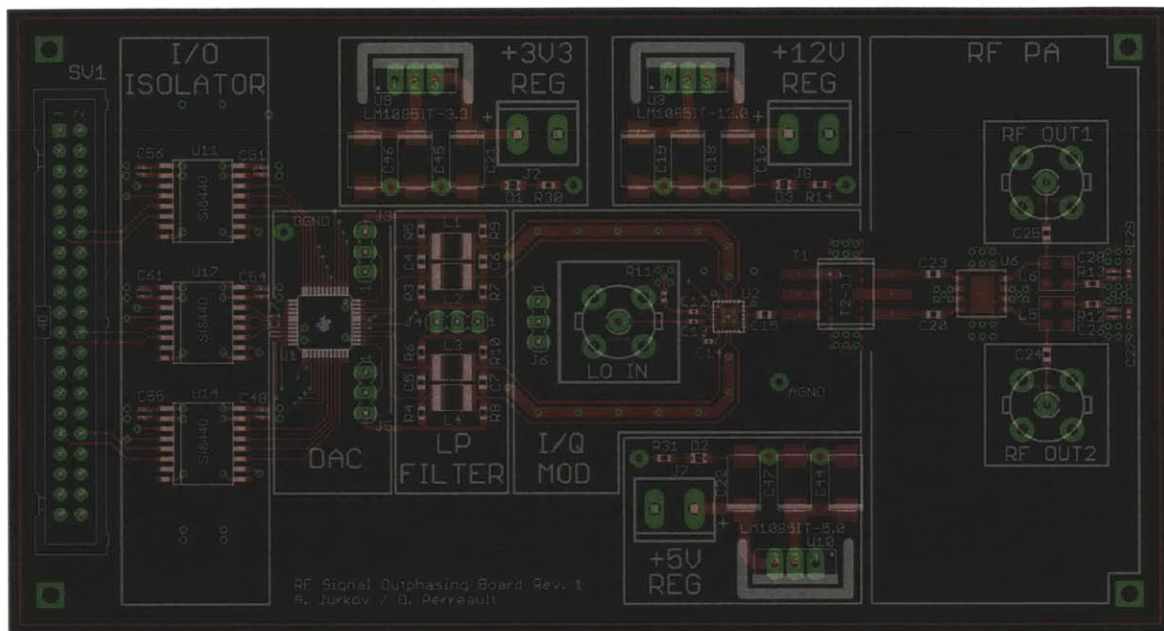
Outphaser PCB top layer copper/silkscreen
